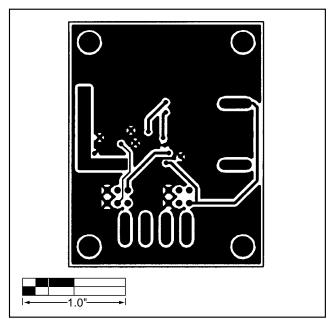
MAX1653 EV Kit PC Board Layout—Solder Side
